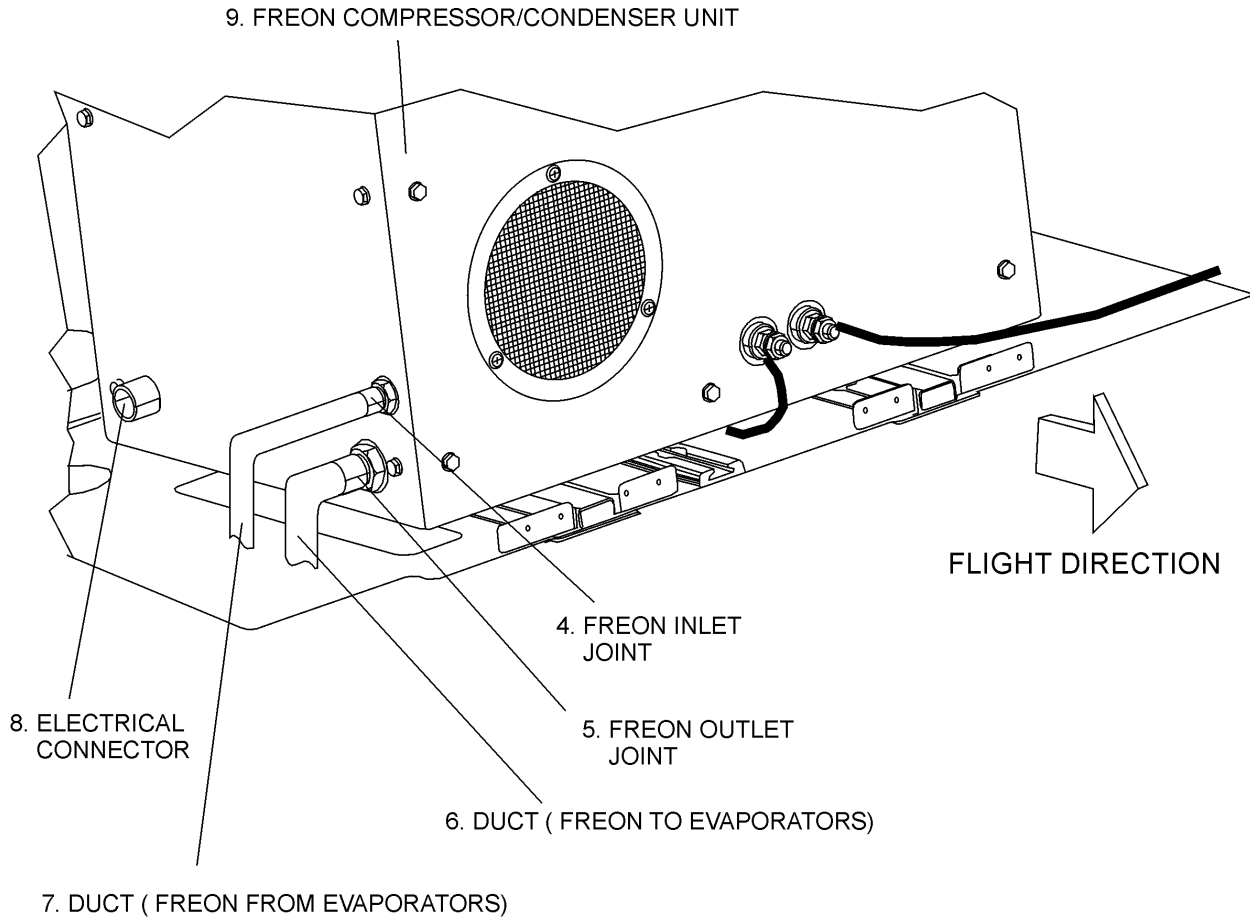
Compressor/Condenser - Removal/Installation (Sheet 2 of 6)
